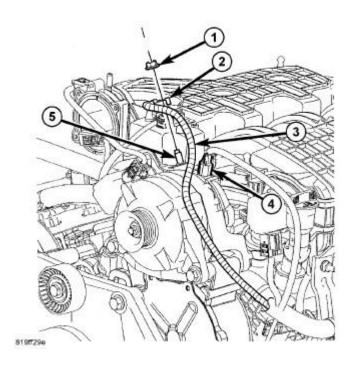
Battery Cables & Assembly Courtesy of CHRYSLER LLC
